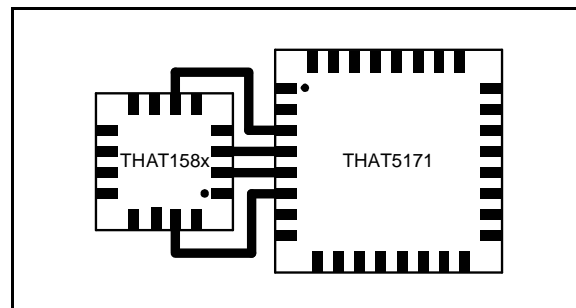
Recommended THAT158x/THAT5171 PCB Layout (mounted on same-side of PCB).
